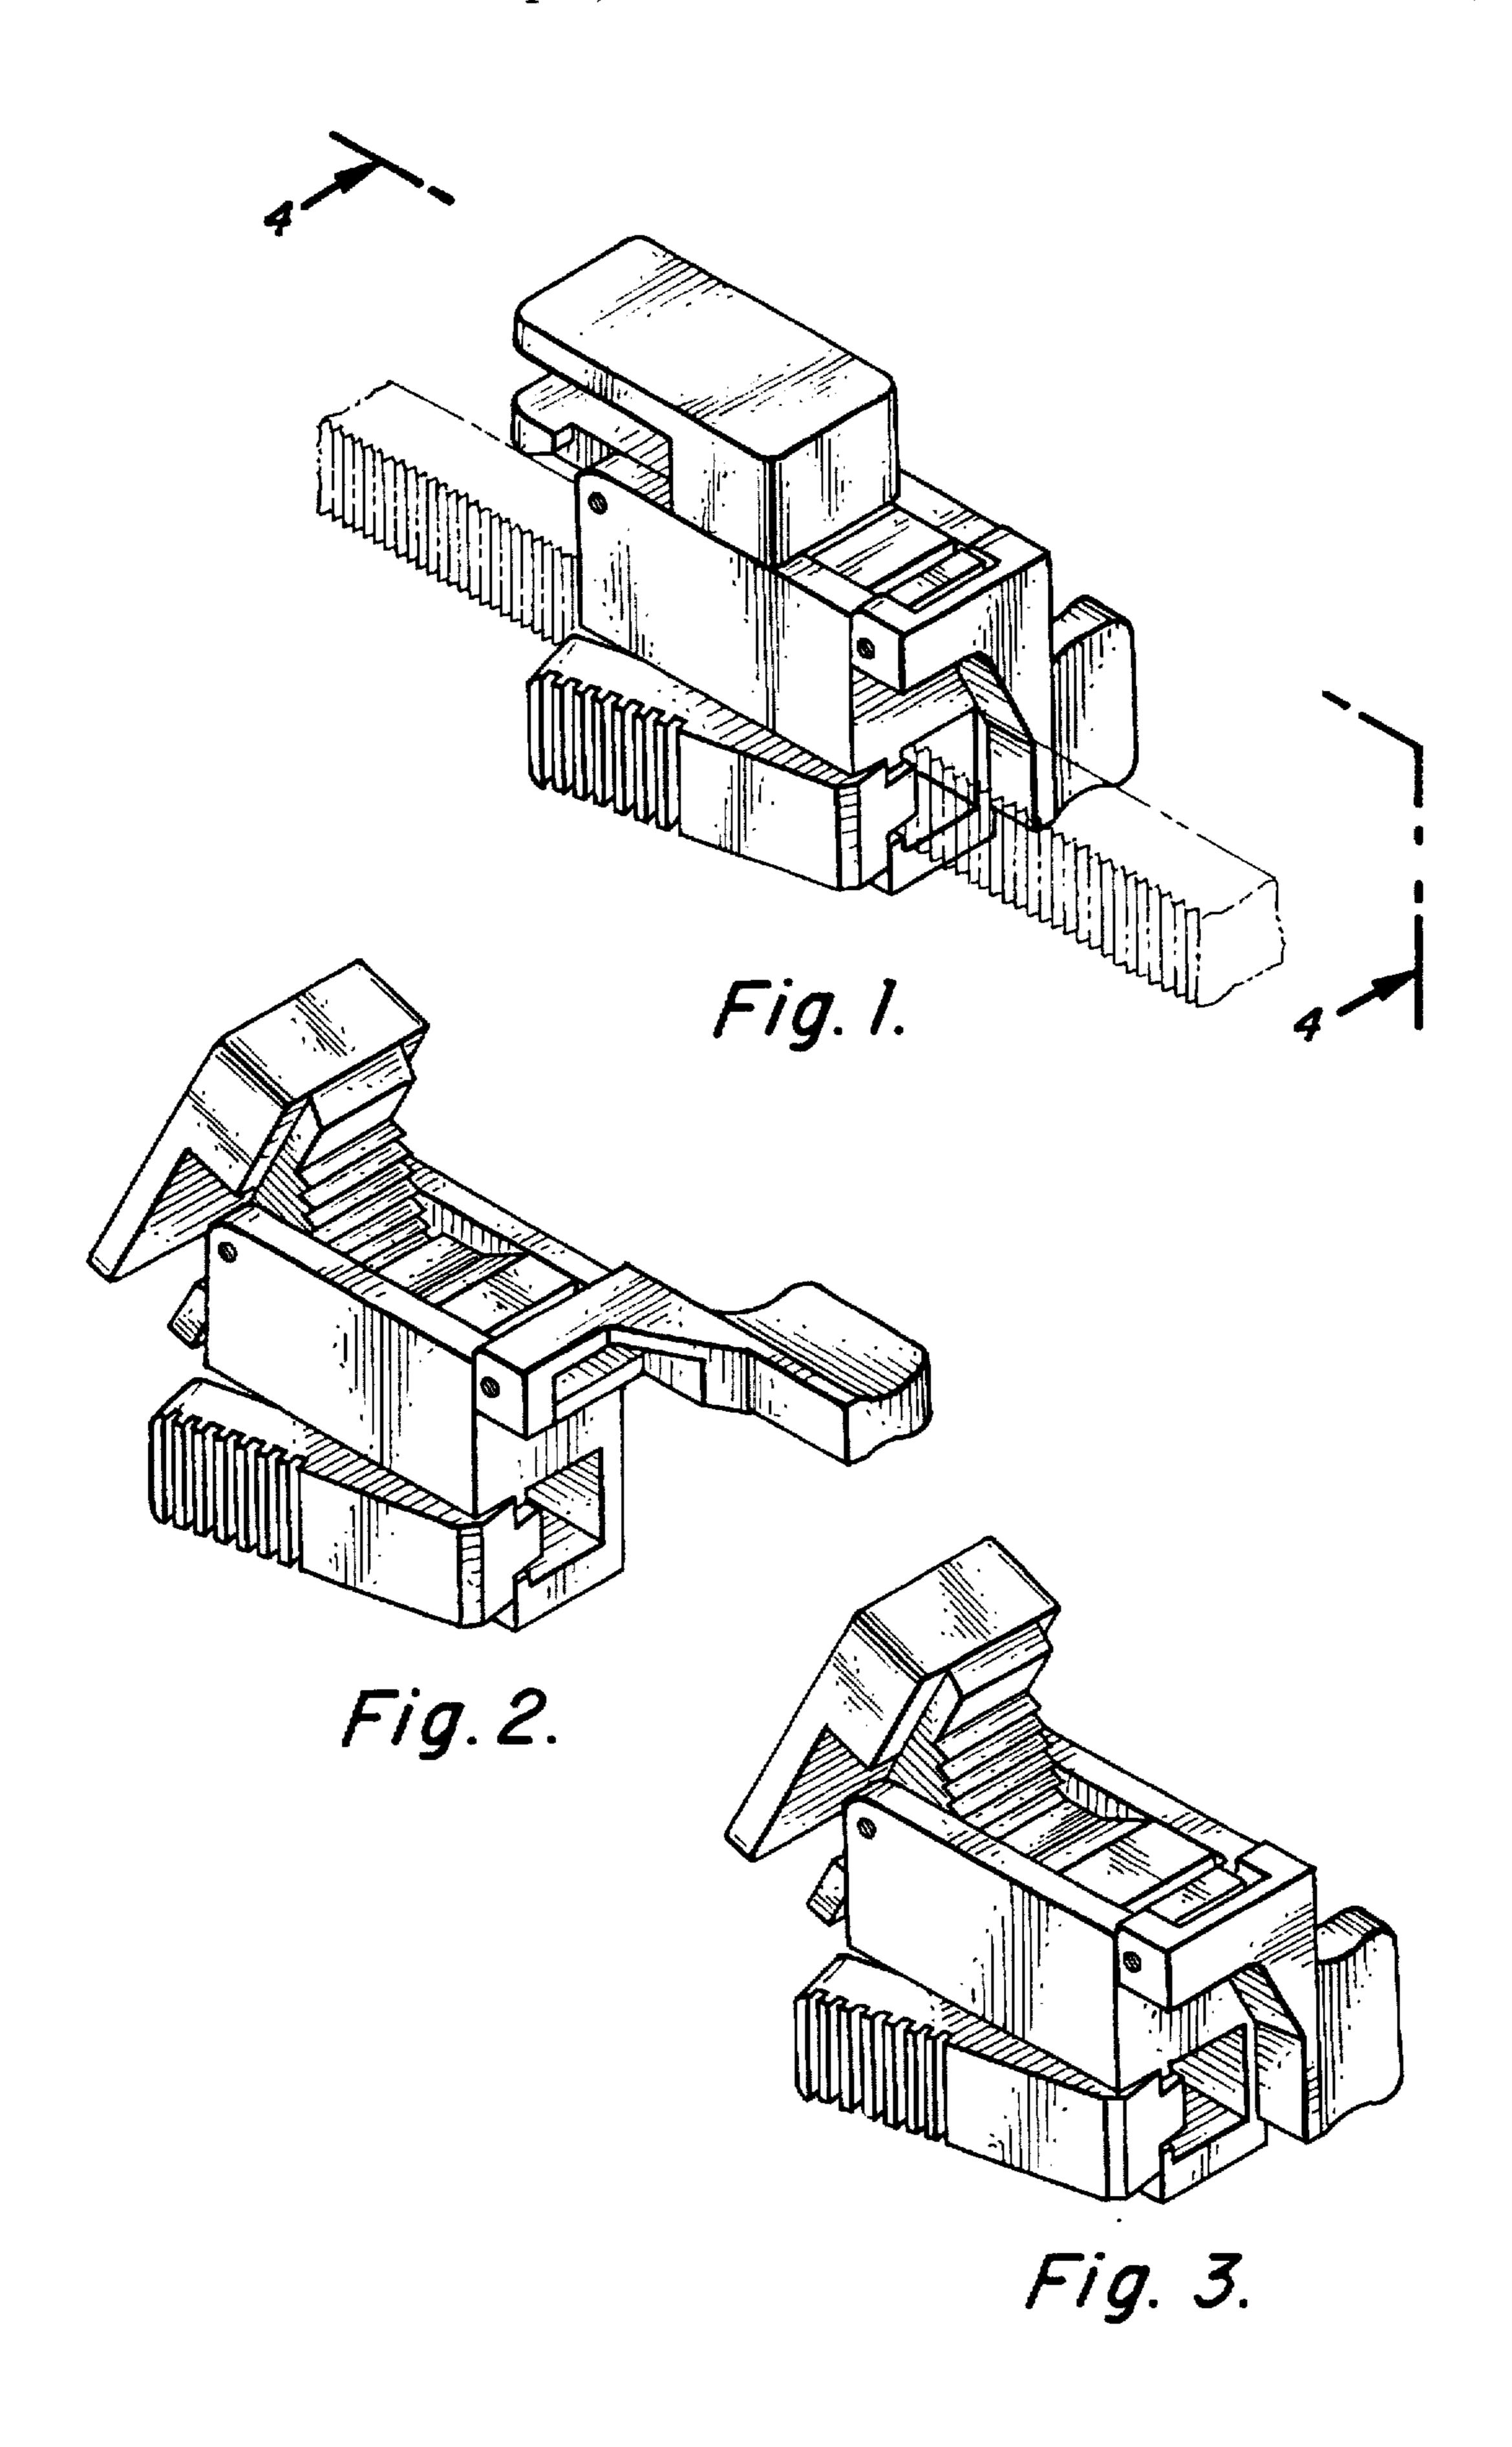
is a perspective view of the ratchet mechanism for a surgical retractor assembly the pawl in closed position;
